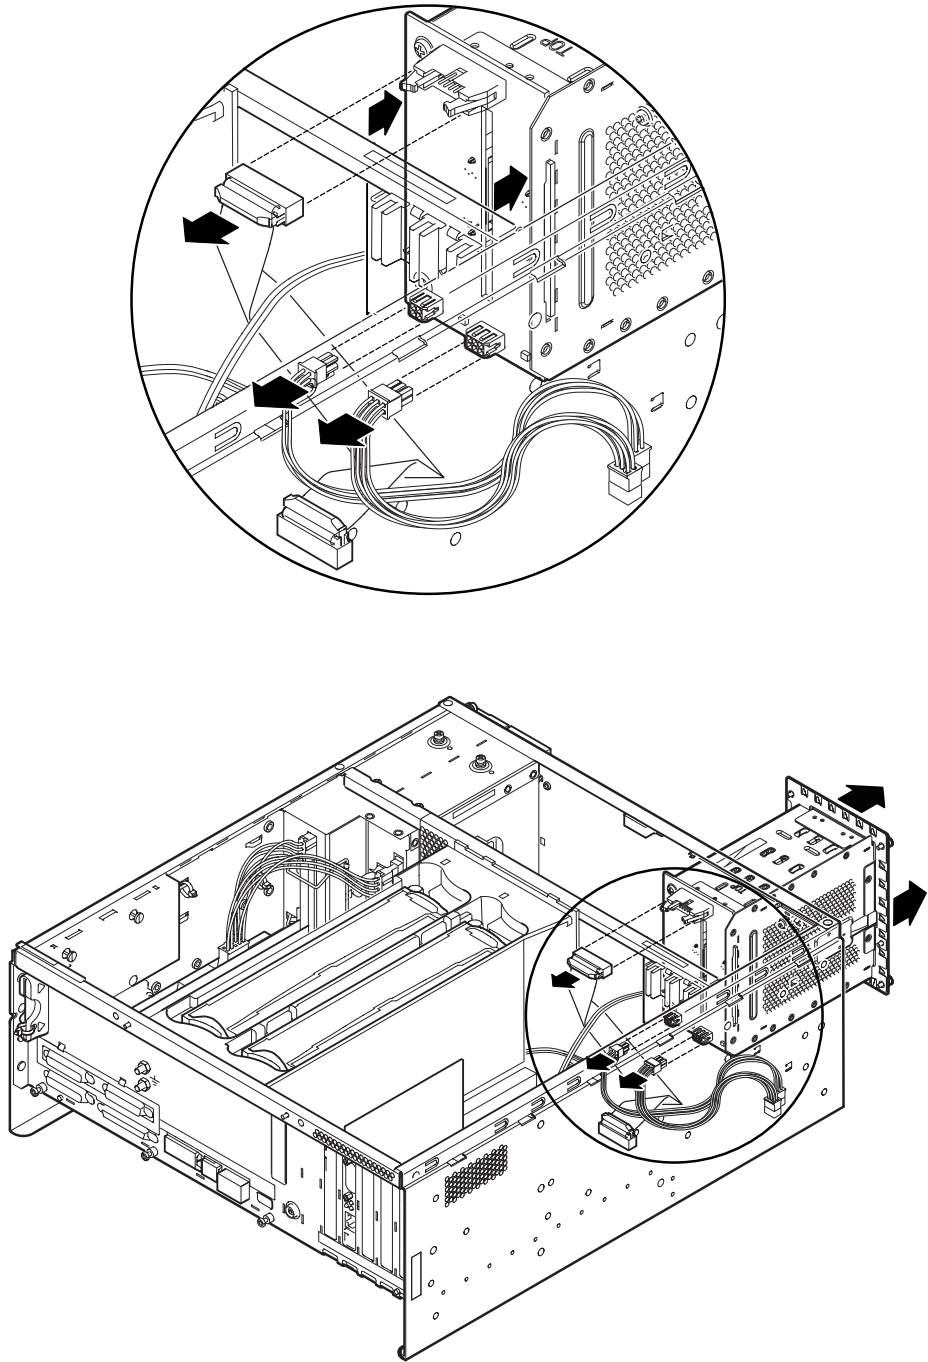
FC-AL Backplane and Drive Bay Assembly
